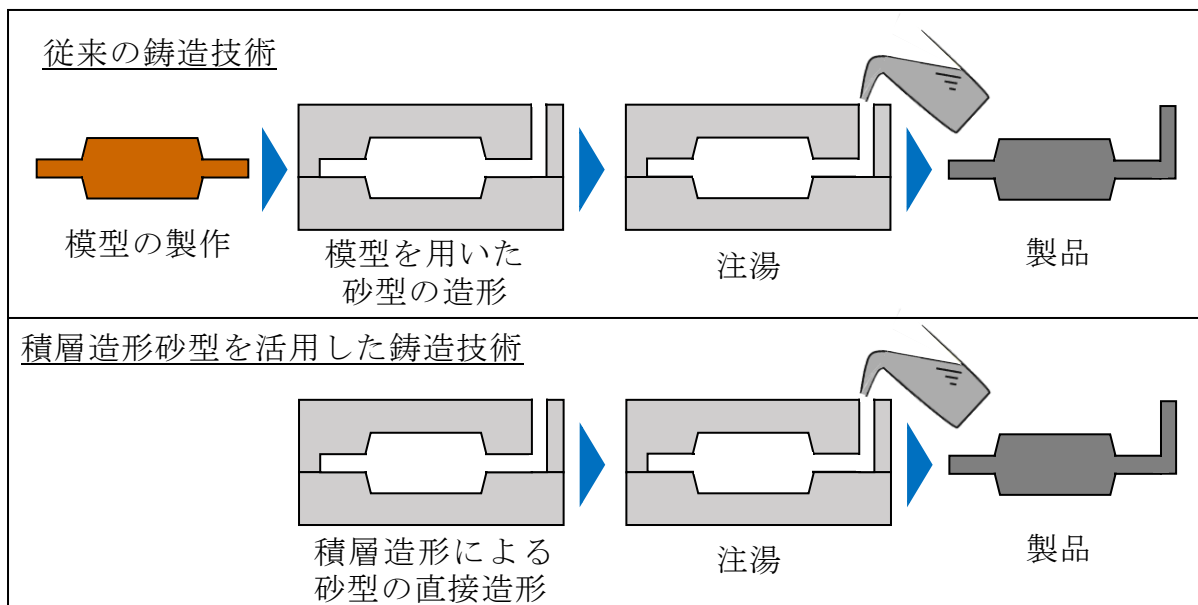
Schematic diagram of casting technology using sand molds made by additive manufacturing.
